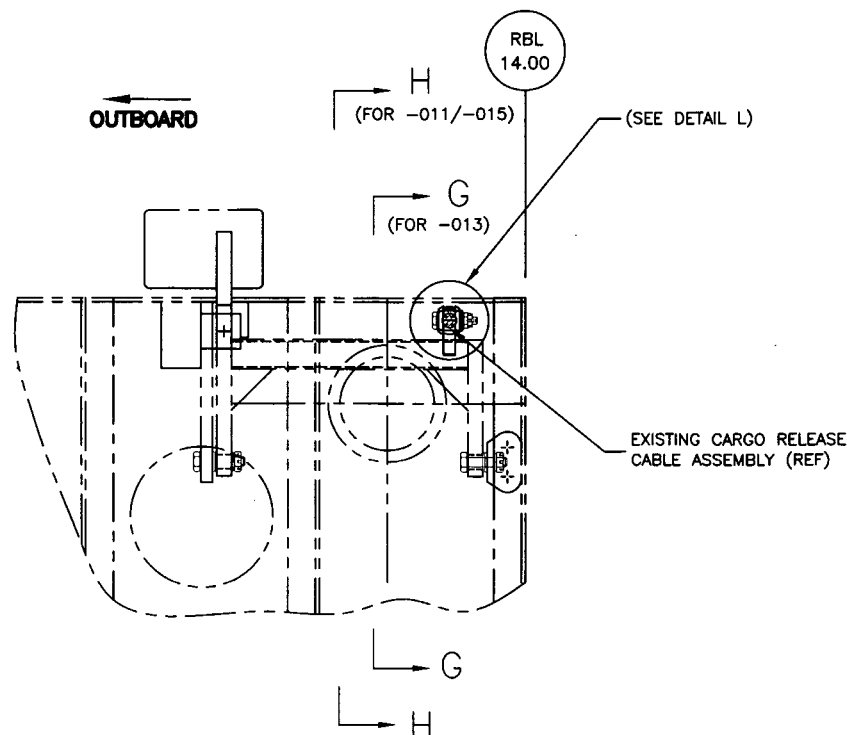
Detail B. View looking Aft (Pilot's Side)
